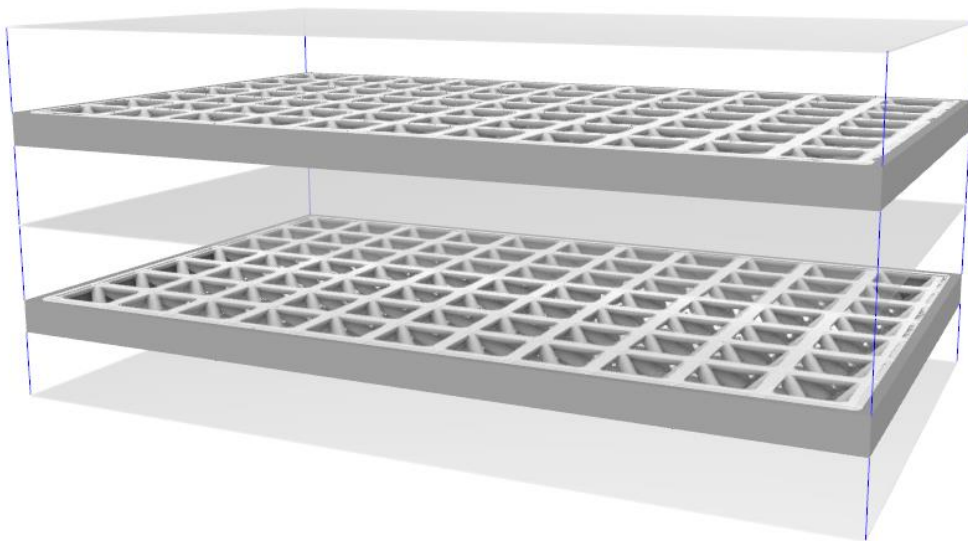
3D exploded view of the panel (250 x 150 mm). Own image.
